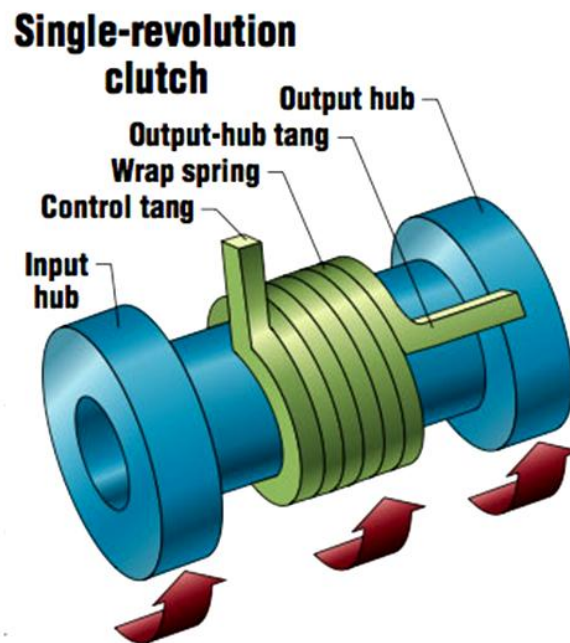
Wrap spring brake, reprinted from <http://machinedesign.com/>. When locked the input hub can spin in the direction of the arrows, but when the wrap spring control tang is unlocked the input hub can spin in either direction. By attaching the HAT and leg segments to the input and output hubs the joints can be locked and unlocked to prevent and allow joint actuation.
